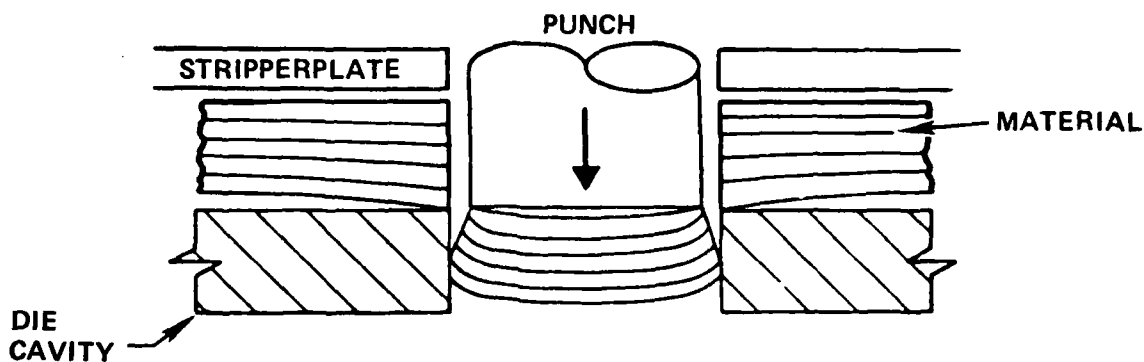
Cross-sectional view of precision stamping and die fabricating a part.
